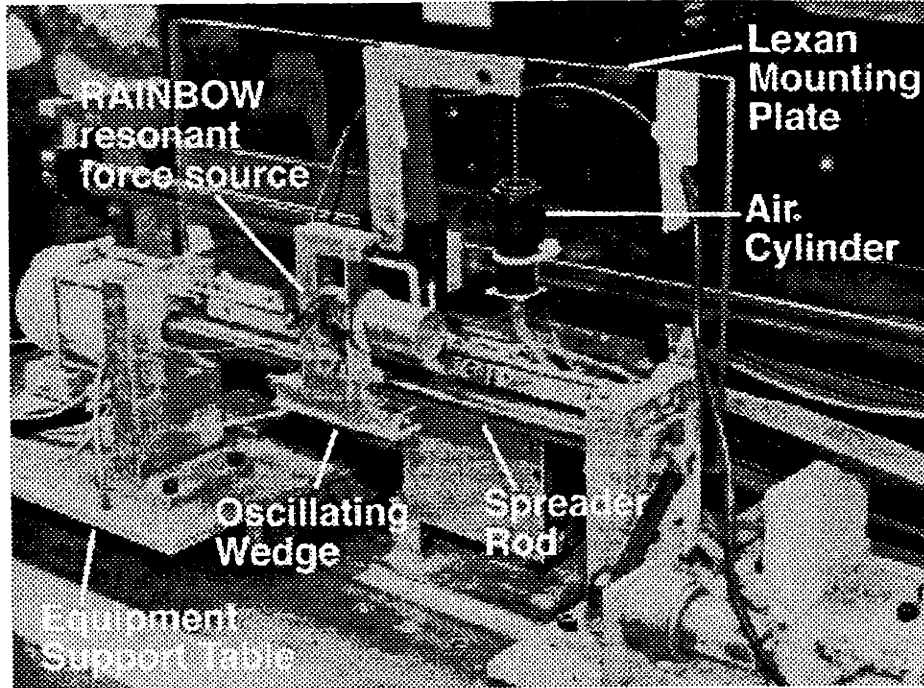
A front view of the new spreading equipment as mounted on the 3DP prototype machine.
